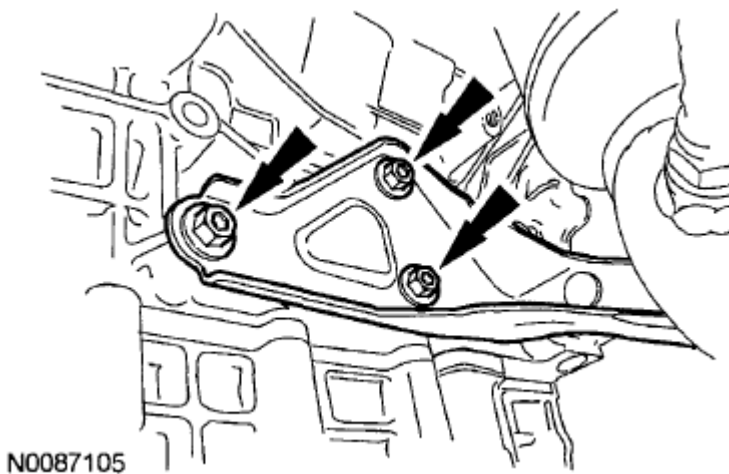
Locating Bolts And Halfshaft Support Bracket
